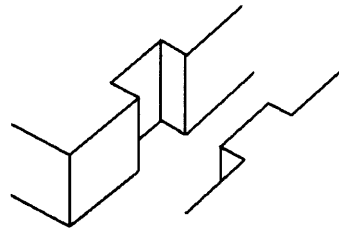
Orthogonal view drawing of slot-tab joint as a possibility for snap fit assembly
